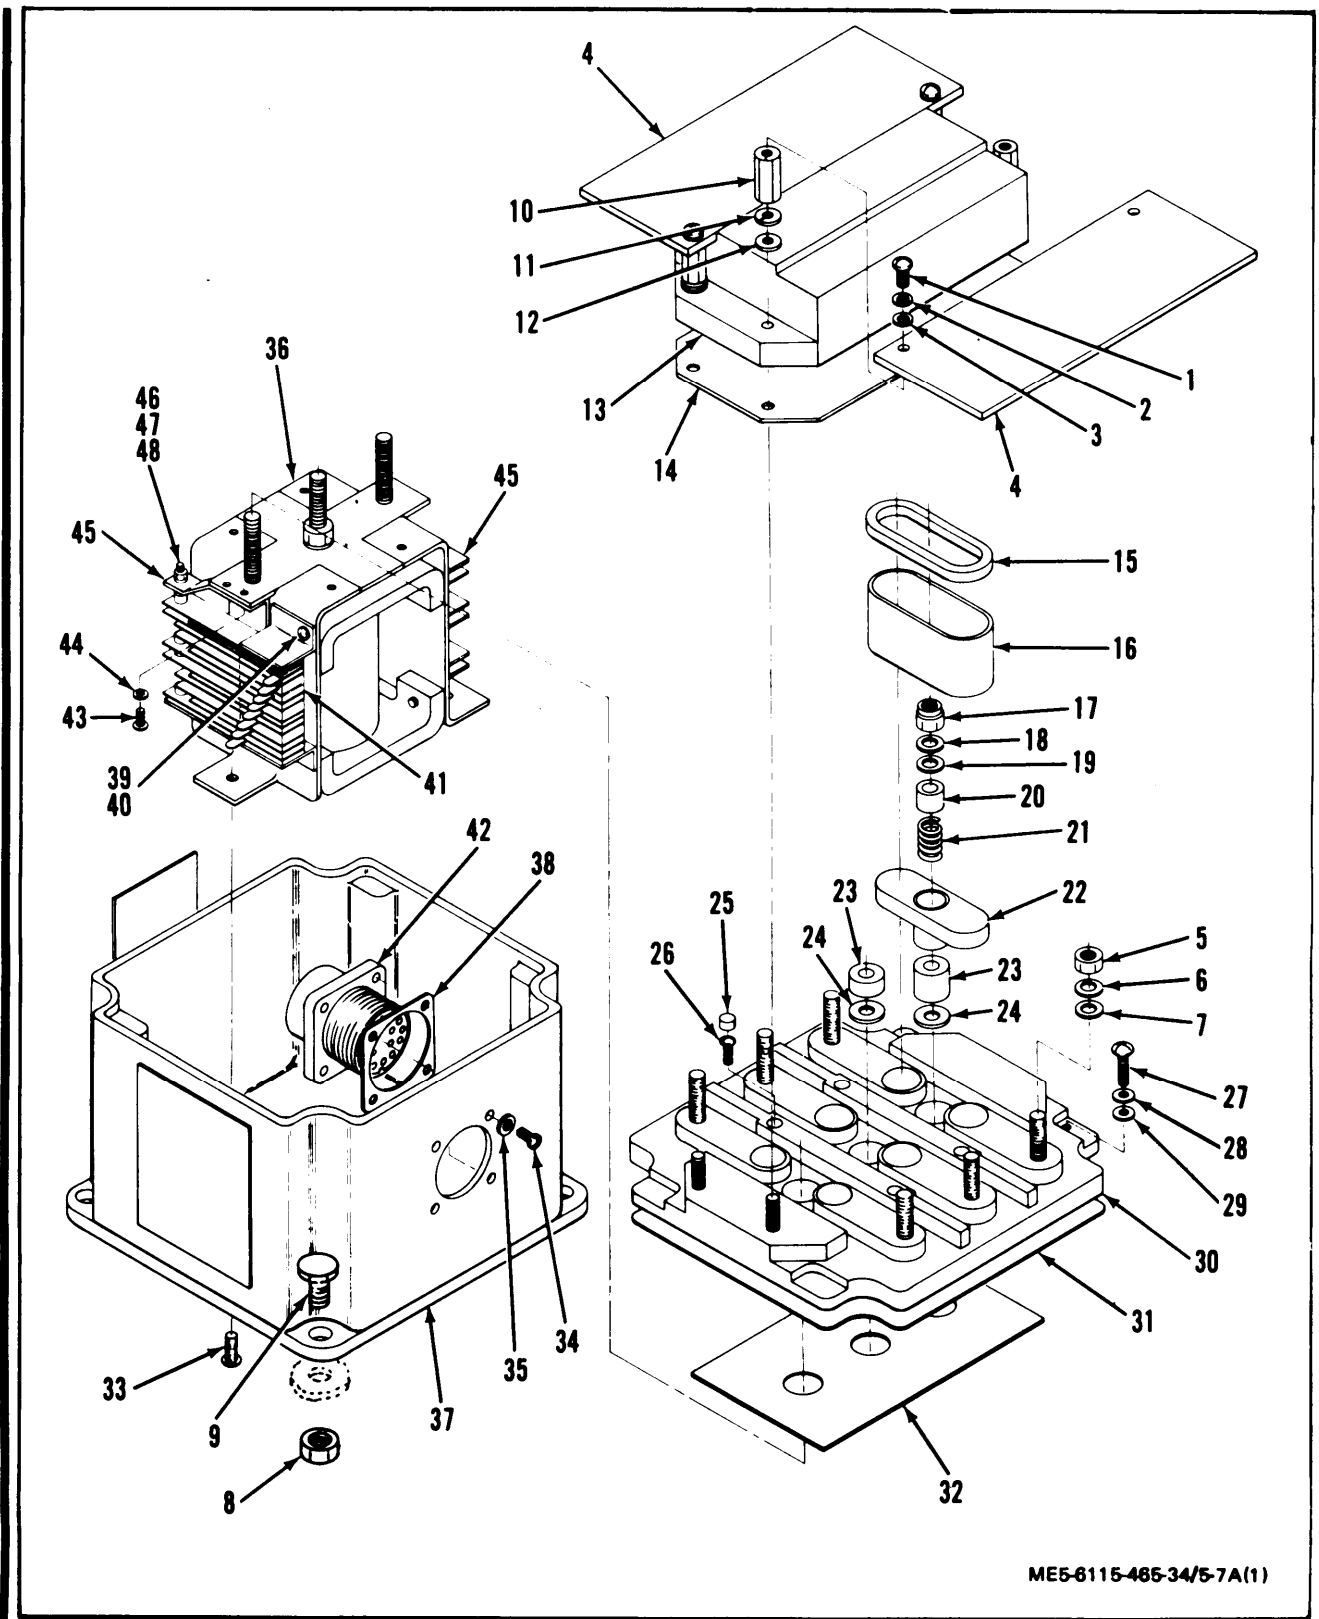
Main Load Contact, Exploded View (Effective with Serial No. RZ70001 and KZ00001 thru KZ02752) (Sheet 1 of 3)
